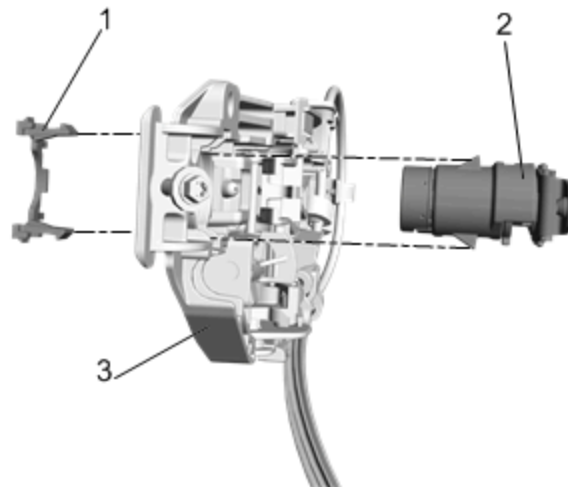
Lock Cylinder Retainer, Lock Cylinder And Handle Bracket
